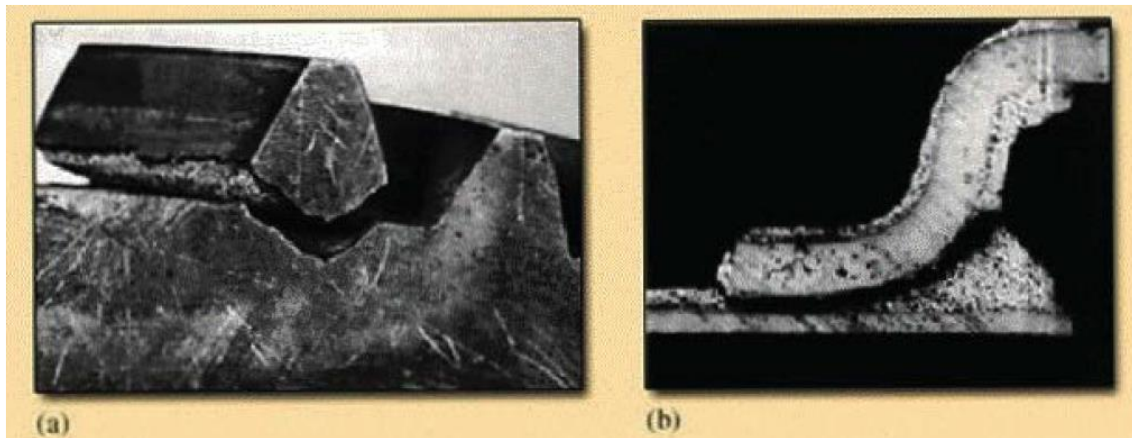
(a) Gear failure -tooth breakage from a fatigue crack that started at the root and arising from bending loads due to the contact driving torque; (b) fatigue failure in solder joint due to expansion and contraction stresses caused by thermal cycling.
